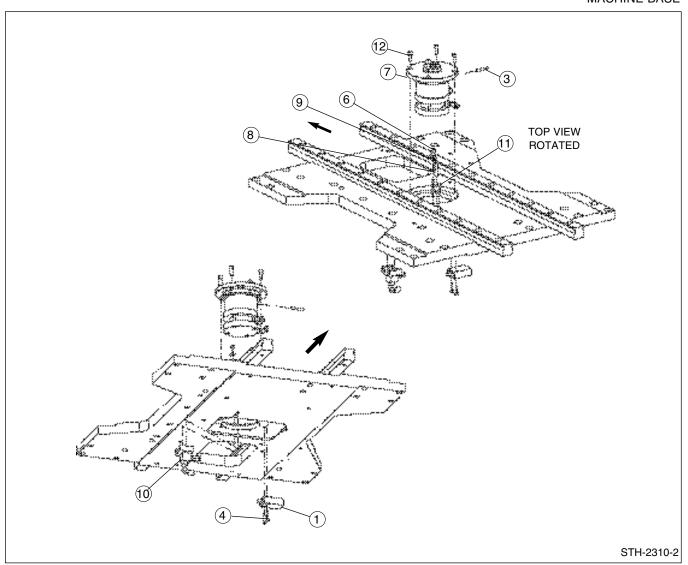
FIGURE H - CARRIAGE ASSEMBLY (2 of 3)
